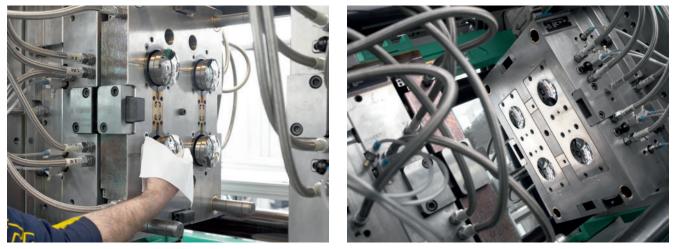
Exchangeable mold inserts enable rapid product change; their highly accurate function surfaces are machined with diamonds for precise shaping
